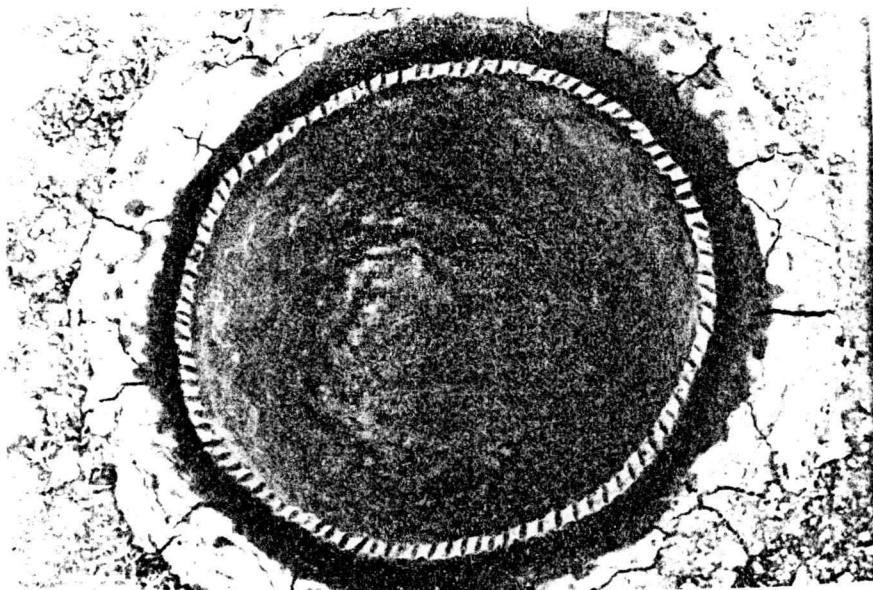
Formed Pot Drying in Mould. Pot has been Greased to Help Prevent Cracking.
